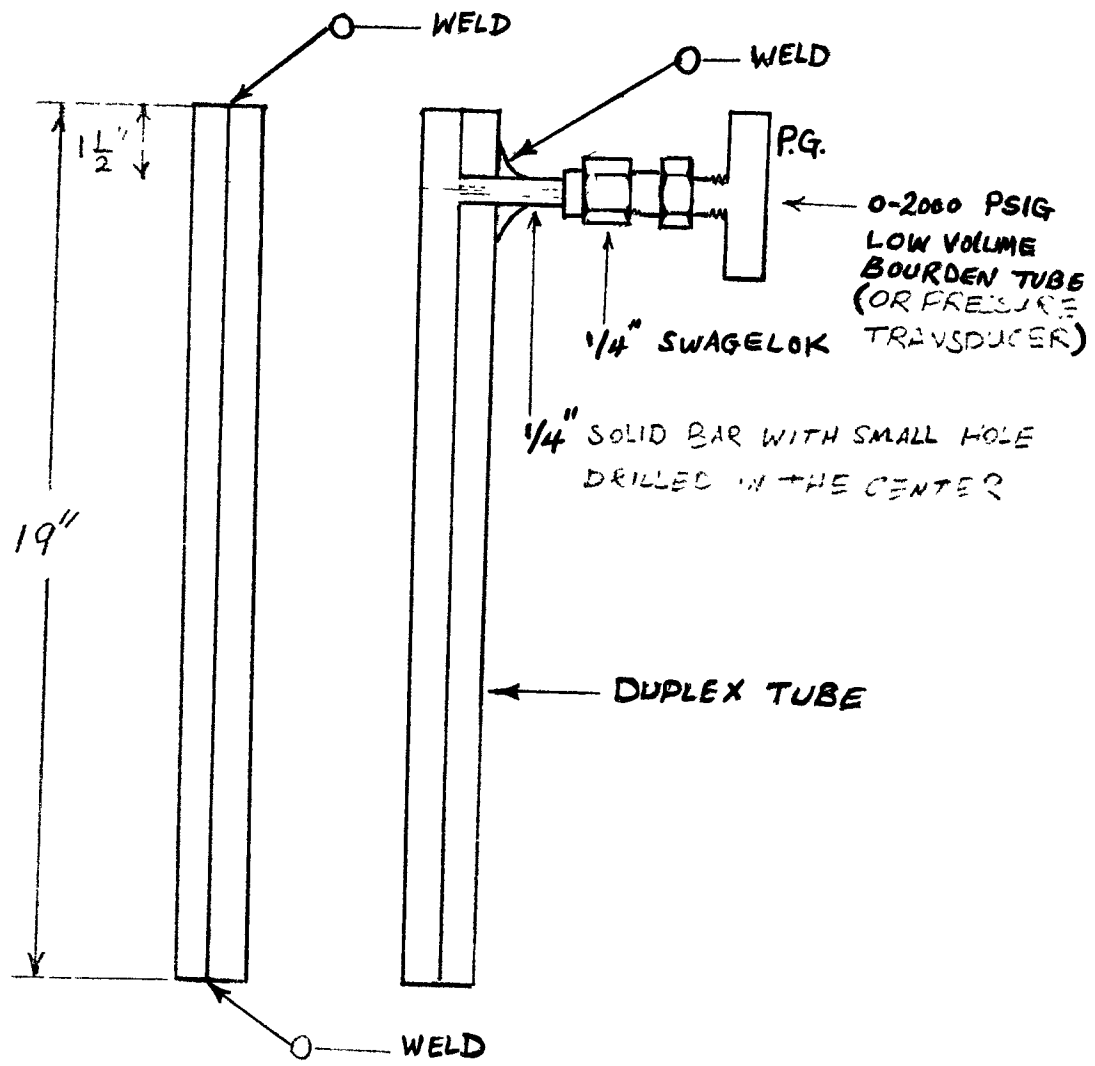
DUPLEX TUBE - PRESSURE GAGE ASSEMBLY
